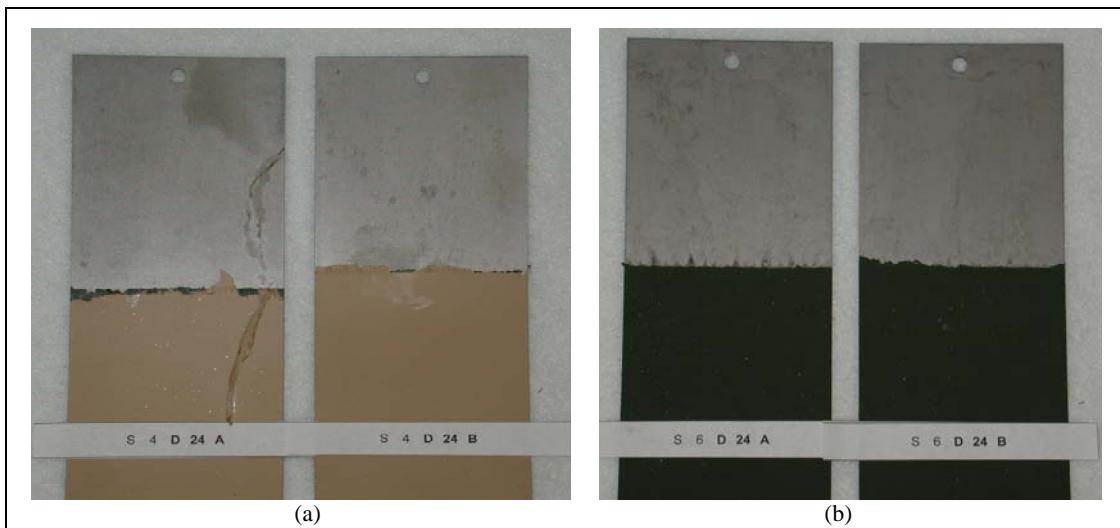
MIL-C-46168 CARC (a), MIL-DTL-64159 Type I CARC (b) on steel substrate, both shown after 30-min immersion in D-Zolve 298.
